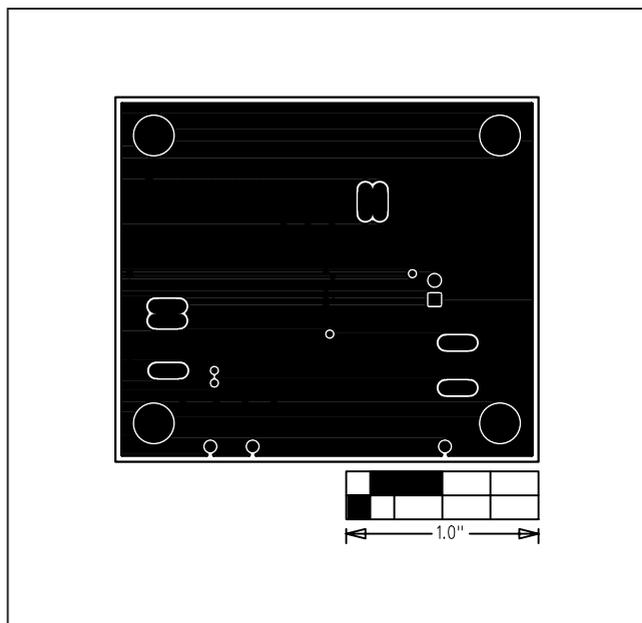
MAX15040 EV Kit PCB Layout—Inner Layer 3
